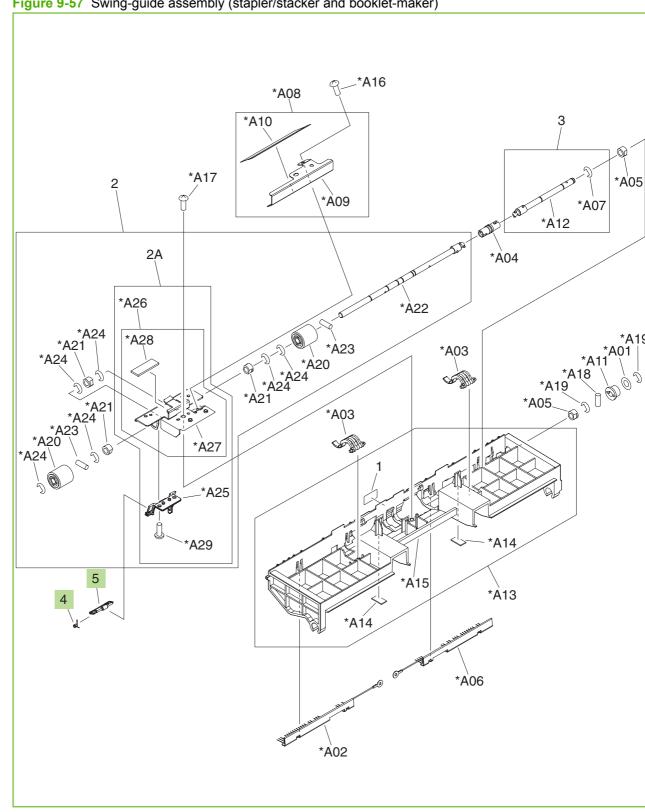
Swing-guide assembly (stapler/stacker and booklet-maker)
